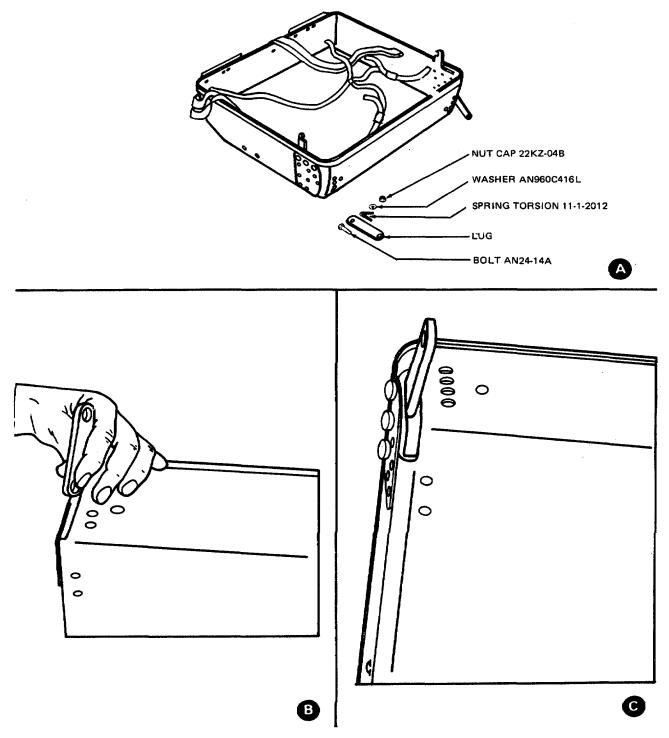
OV-1 aircraft rigid seat survival kit with harness assembly (Sheet 2 of 3)
